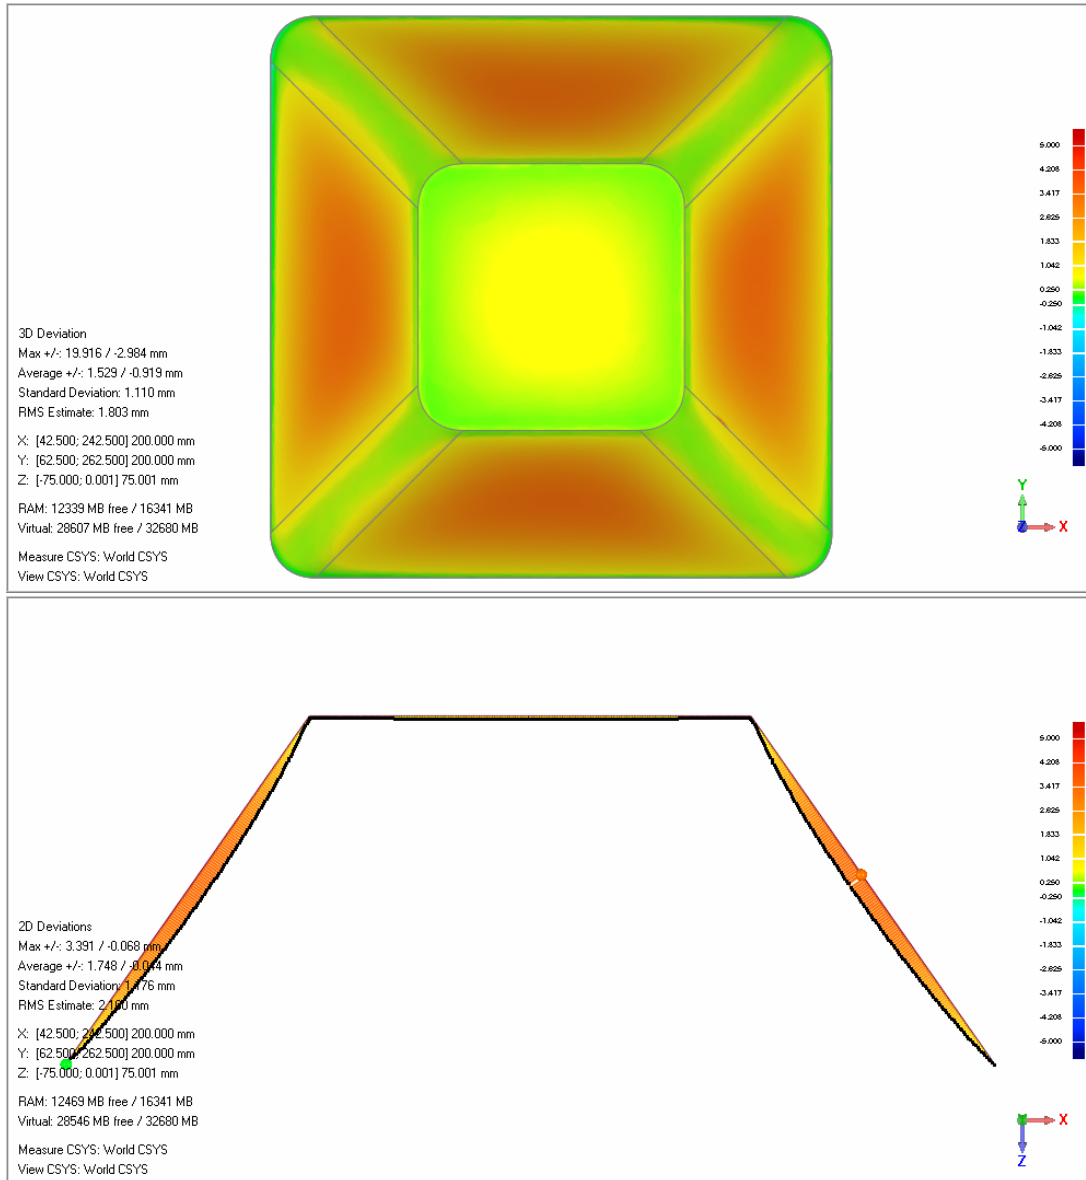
Part T2A geometric accuracy results - top view and cross-section view
